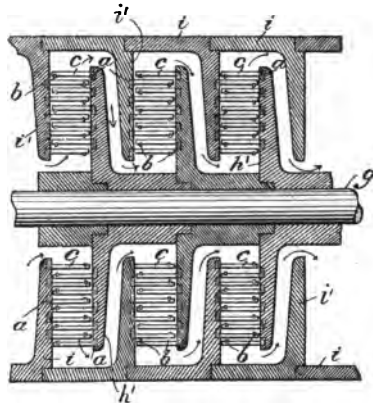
Parsons Radial-flow Steam Turbine, Partial Axial Section.
